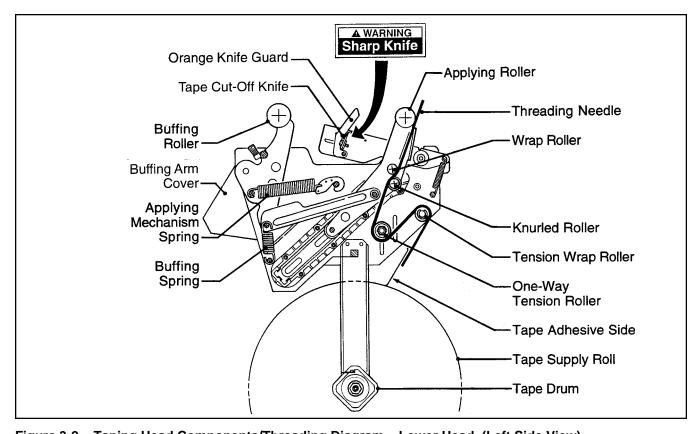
Taping Head Components/Threading Diagram - Lower Head (Left Side View)
